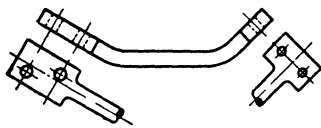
is a perspective view of a small casting and Fig. 11 a projection drawing of the same piece. By adding to Fig. 11 the dimensions which would be necessary to construct the piece, and other necessary data as to material, finish, etc., this would become a complete detail drawing.
